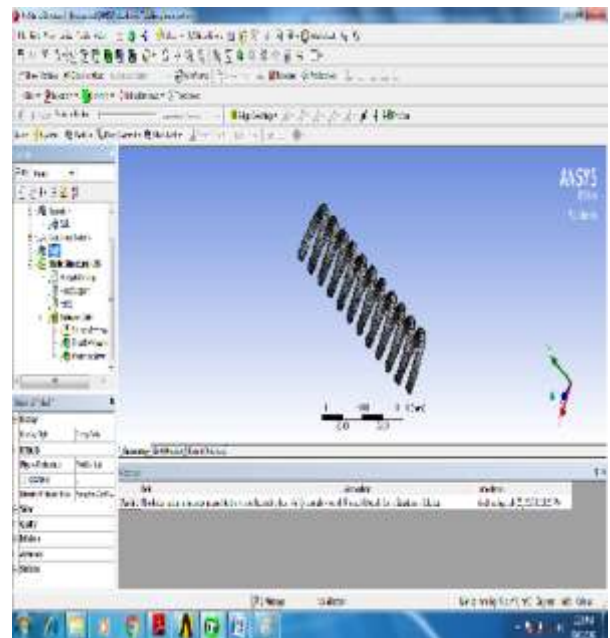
3D Modeling of Steel helical spring (Meshed body)
